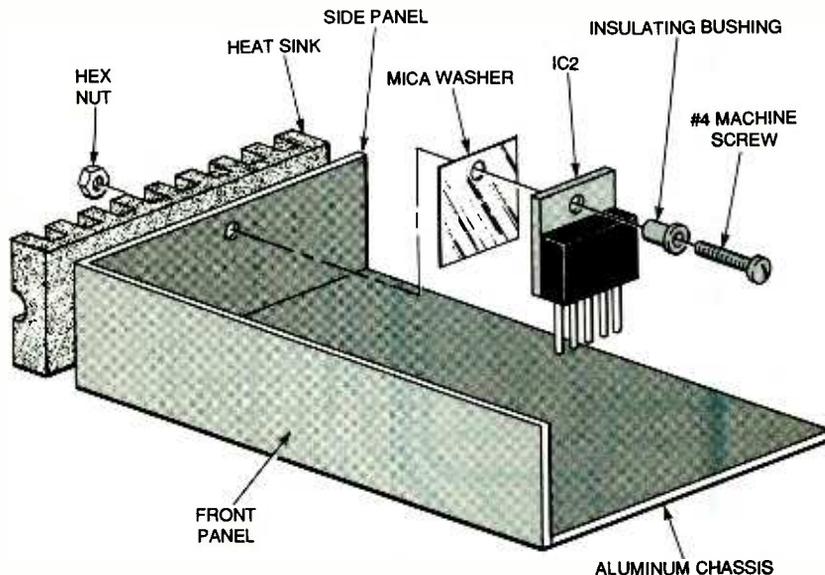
It is important to electrically insulate IC2 from the chassis and heatsink.
